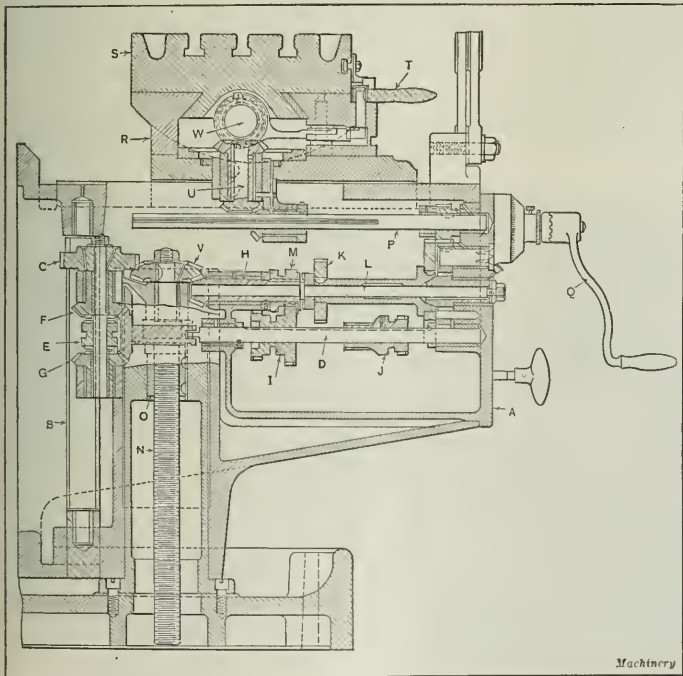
Sectional View, showing the Important Mechanisms in the Knee
